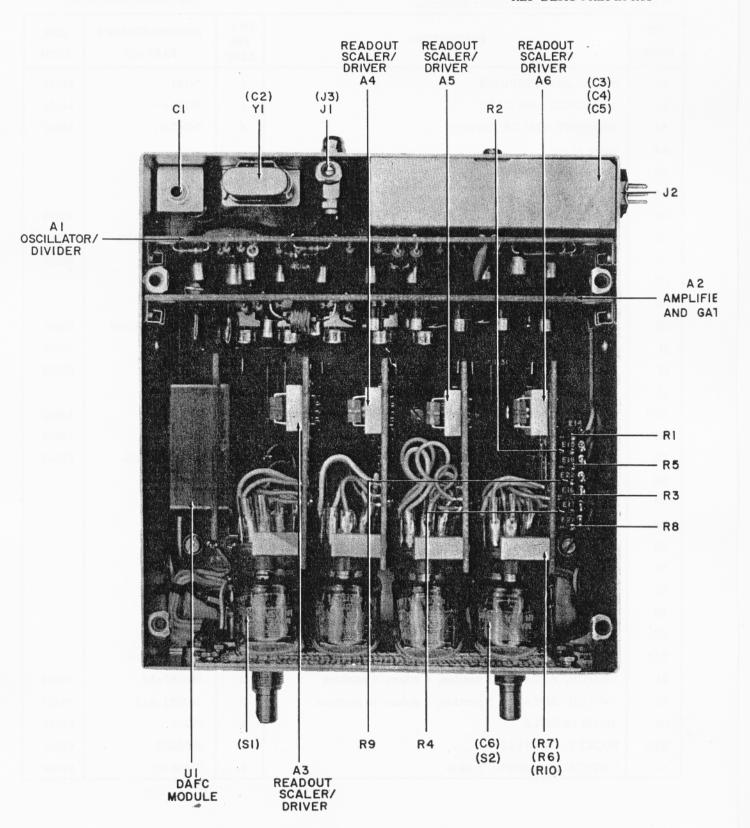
Type 79189 VLF Counter Assembly, Component Locations
